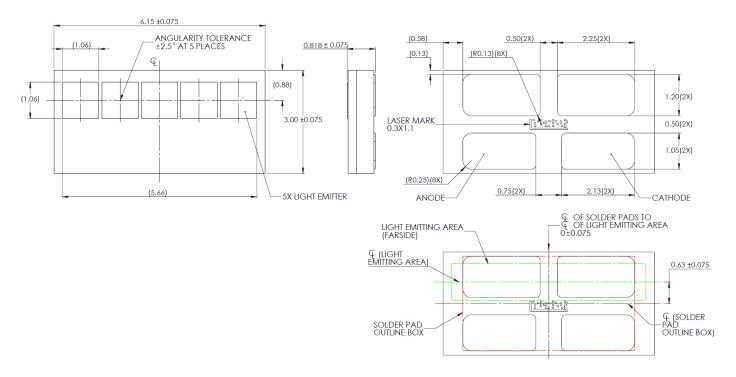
Mechanical Dimensions for LUXEON Altilon SMD 1x5
